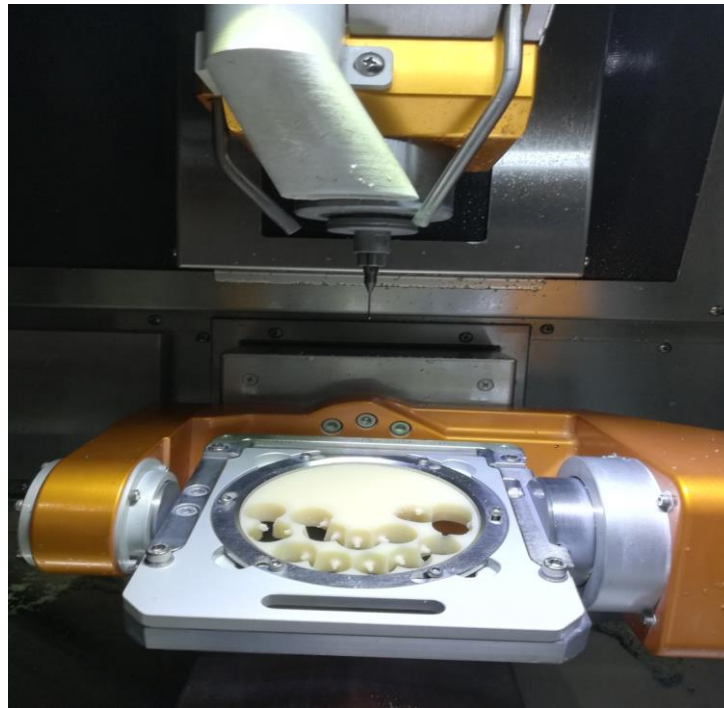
PMMA workpiece hold on CNC ARUN 5X-200 Milling machine
